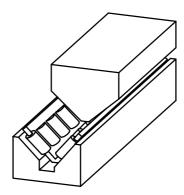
Non-recirculating linear roller bearing, linear guideway, V-angle type
